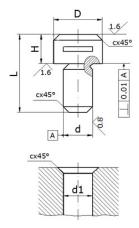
Supporting pin with plate cylindrical head - surface C.
